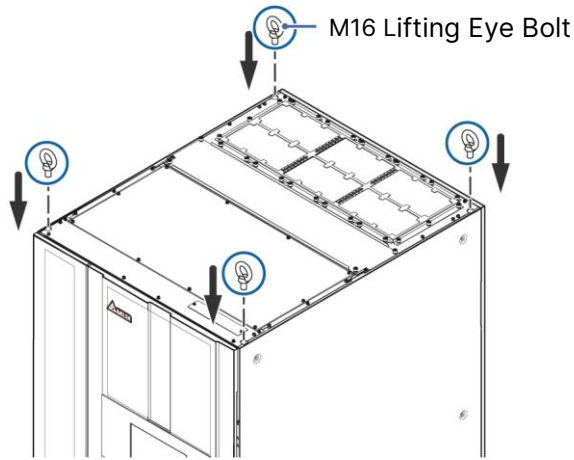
Installation of M16 Lifting Eye Bolts
